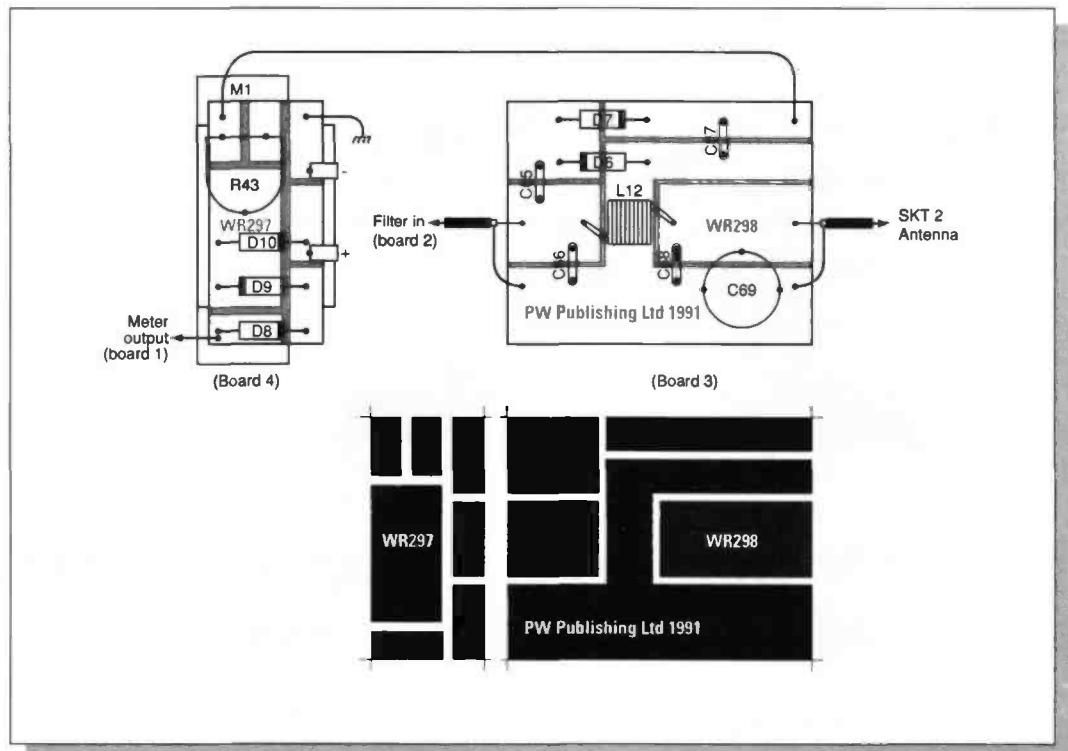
Surface-mount type p.c.b. overlay details for the metering board 4 (left) with the p.c.b. design (WR297). The surface-mount design and overlay for the filtering board (board 3) is shown above the associated p.c.b. design (WR298).
